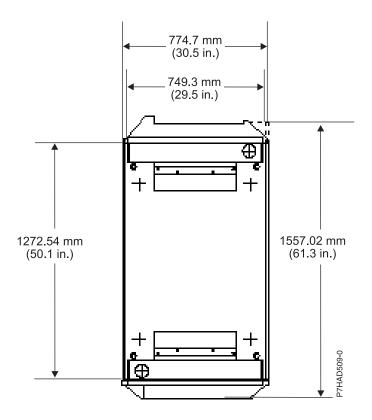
Plan view for single-frame systems with slimline doors and a Rear door heat exchanger
